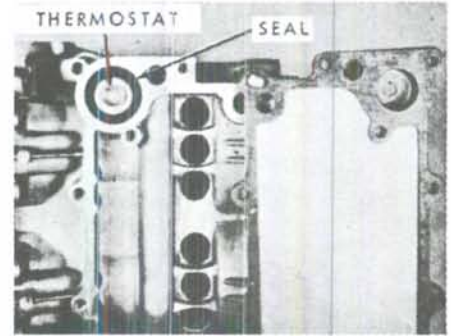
The thermostat on late models is located under the exhaust and water manifold covers.
